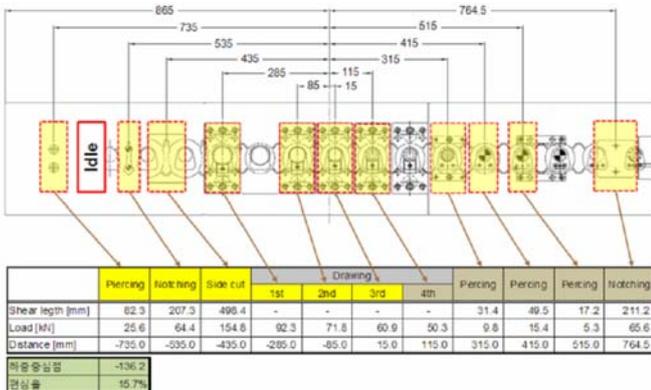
Forming and cutting load of Bracket - RR Seat Back
